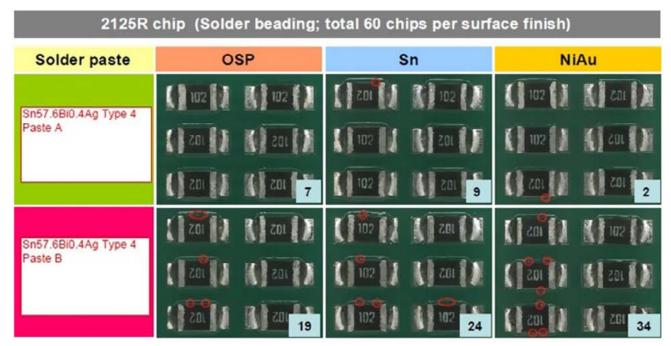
Sn57.6Bi0.4Ag Paste A versus Paste B solder balling on 2125 [0805] soldered pure tin-coated chip components.
